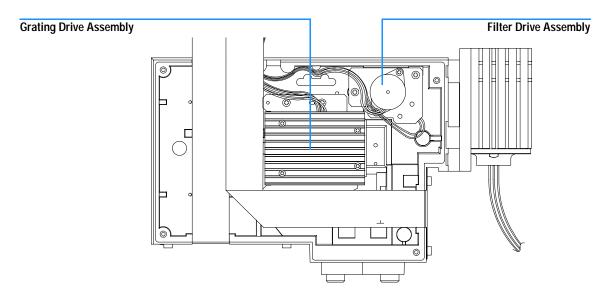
Location of Replaceable Parts in the Optical Unit (Bottom Section)
